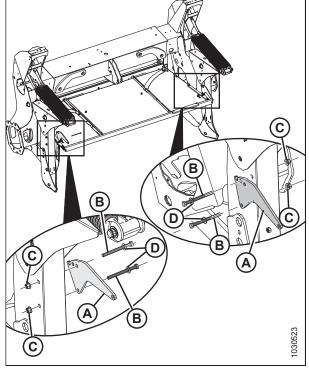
Setting Forming Shield for Header with the DWA Option
